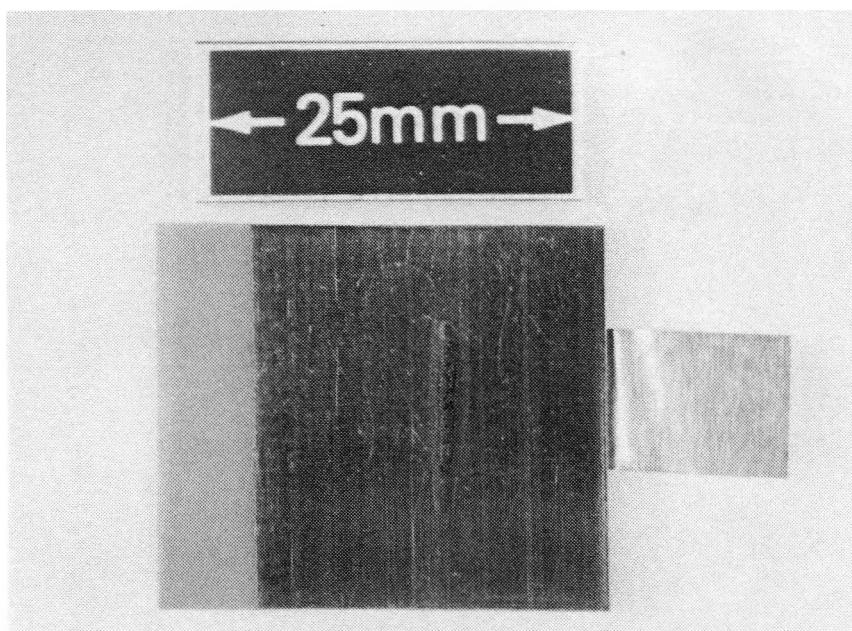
Opposite Side of Parallel Gap Resistance Seam Weld
